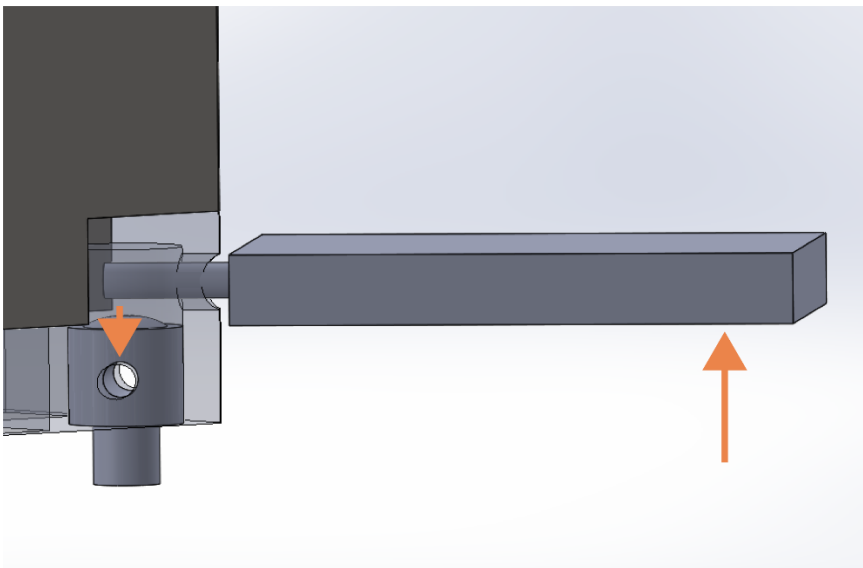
Grub screws in the bottom holes keep the QD mechanism in place.
